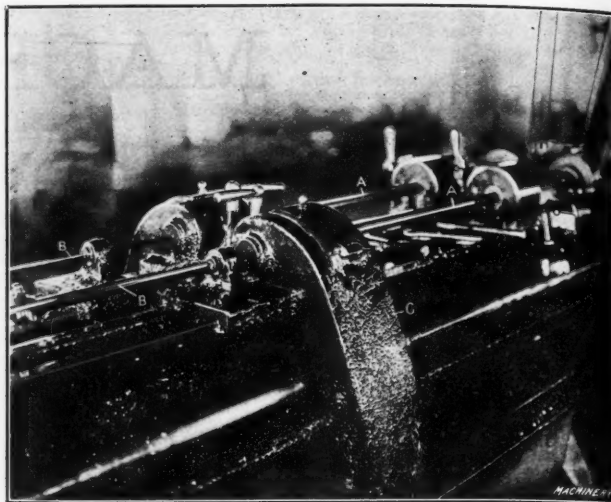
Detailed View of Pratt & Whitney Rifle Barrel Drilling Machine
